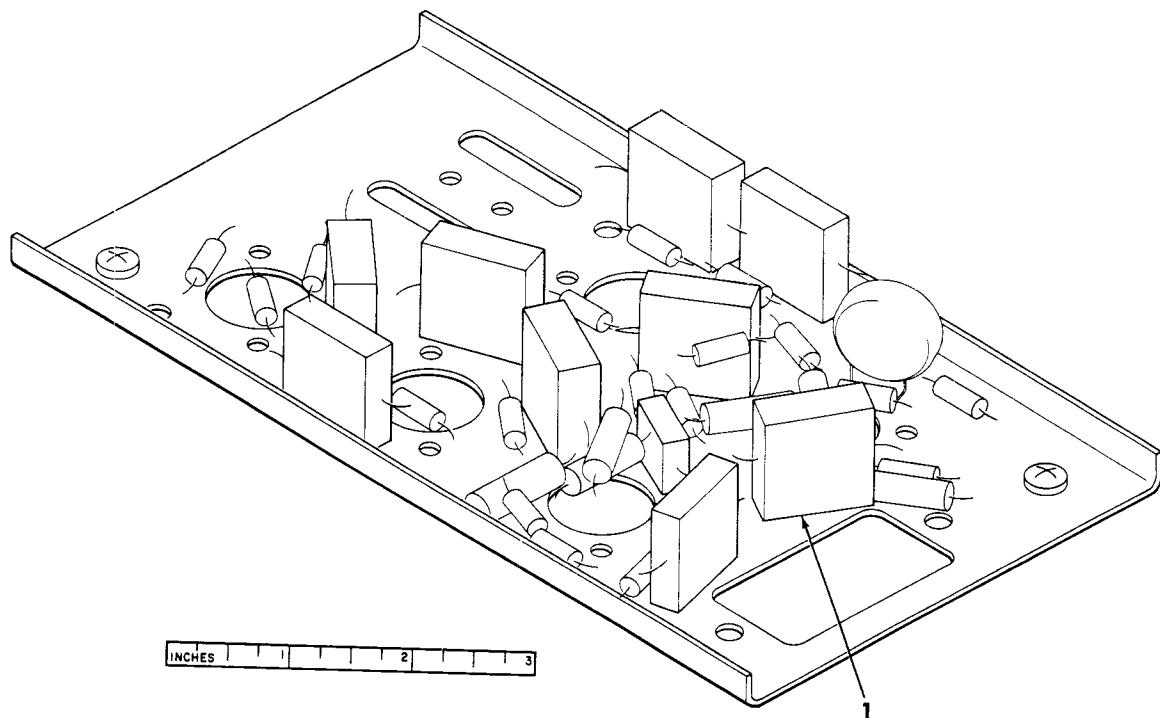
Amplifier, electronic control AM-1056/M (7614253)—exploded view
